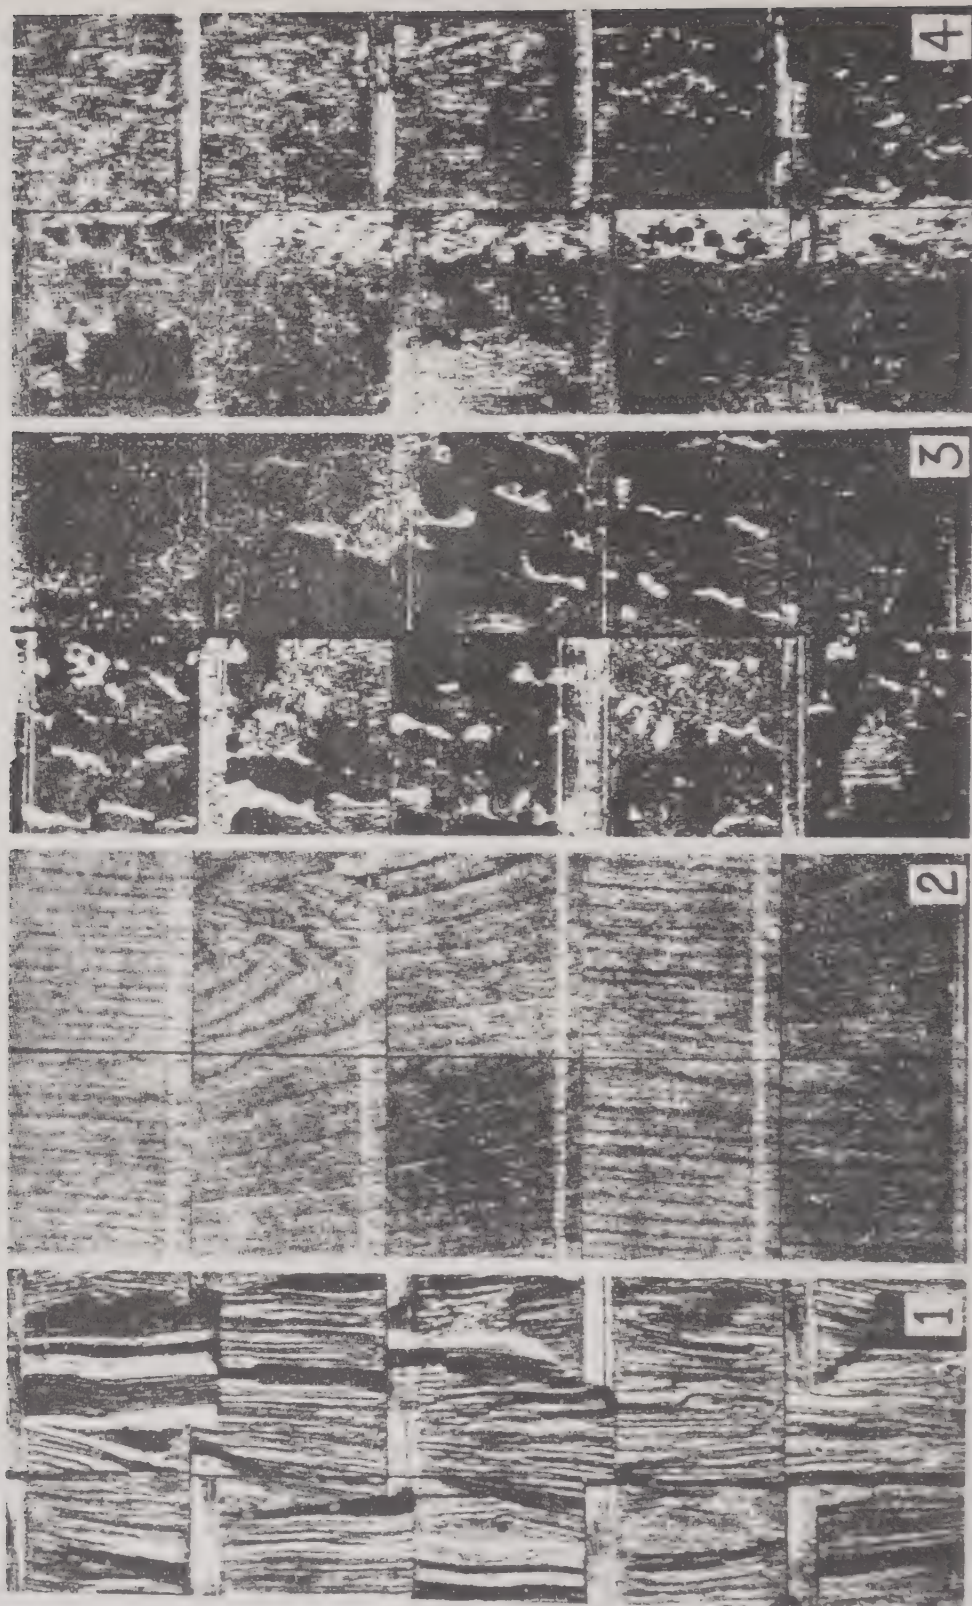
Photograph of types of joints produced with animal glue under varying gluing conditions. (1) Well glued joint; (2) Starved joint; (3) Chilled joint; (4) Dried joint.
